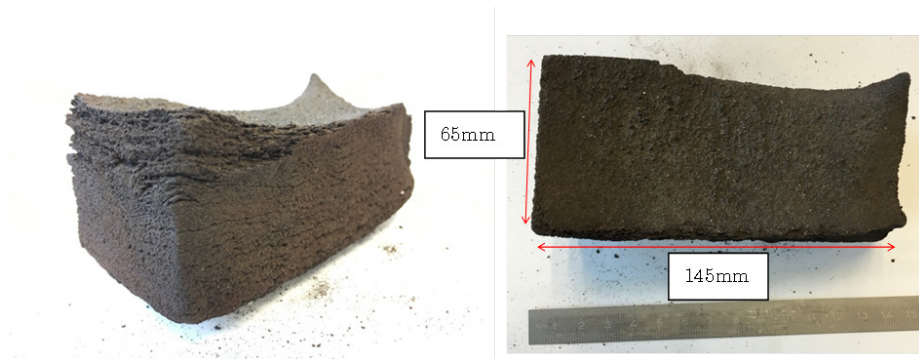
Part sintered with Test 14 parameters collected out the mould made of porous ceramic bricks.
